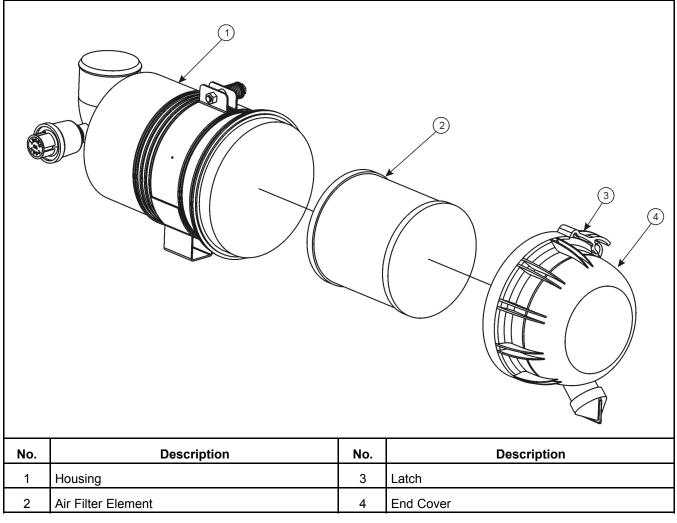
EXAMPLE OF HEAVY DUTY AIR CLEANER
